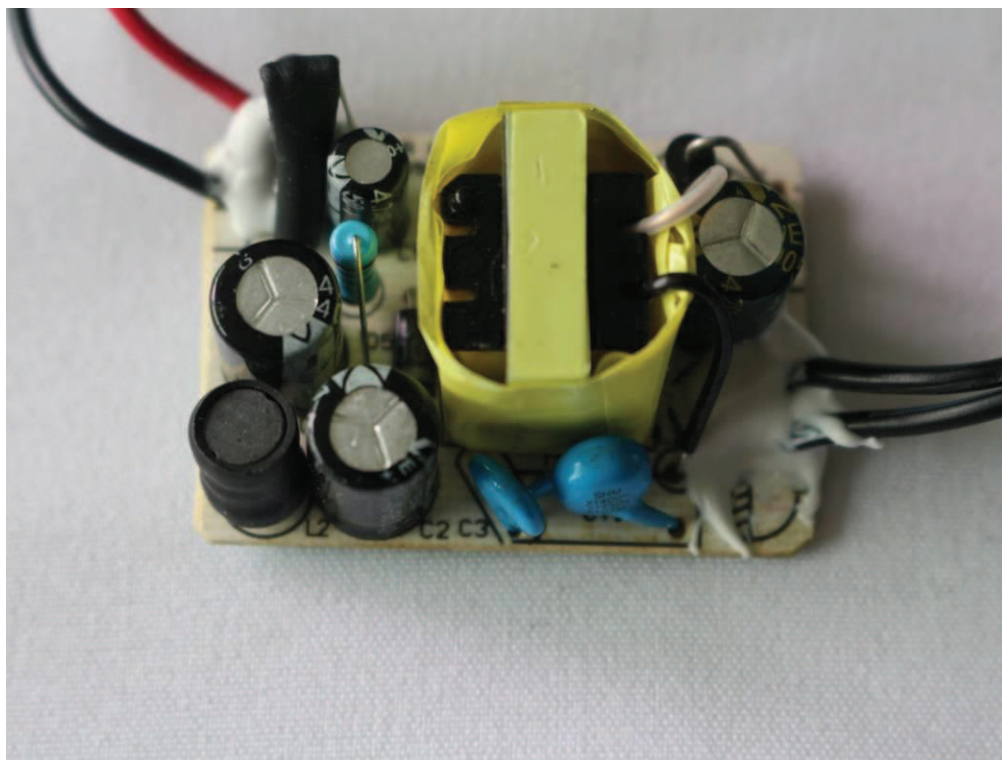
Component side view of RKPO-zzxxxxyyy-D1 (after removed glue)
